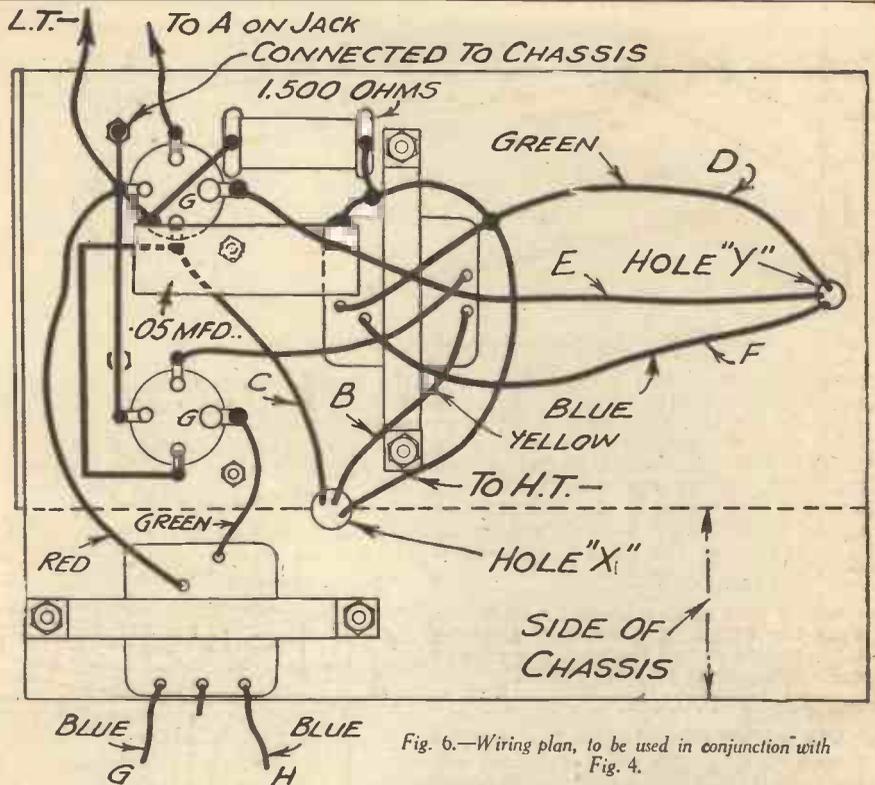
Wiring plan, to be used in conjunction with Fig. 4.
